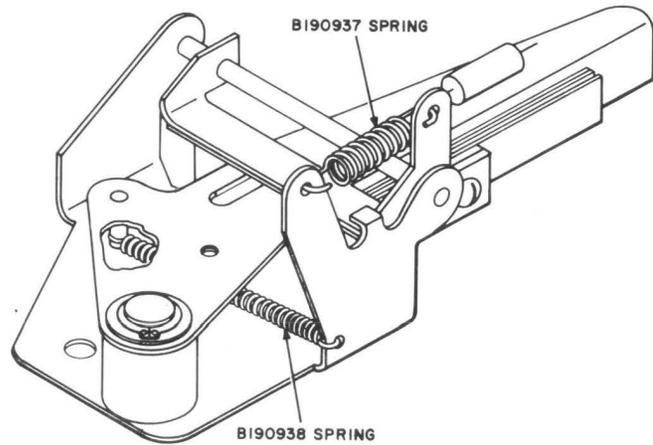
Details of B-190934 Limit Switch (S1) Assembly
